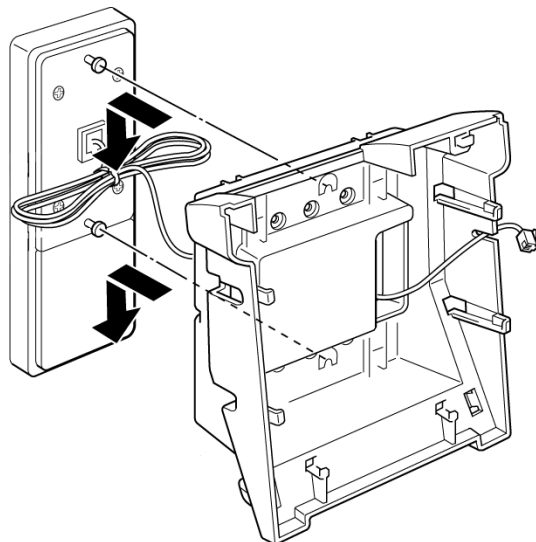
Mounting Wall Mount Unit on the Wall Plate
